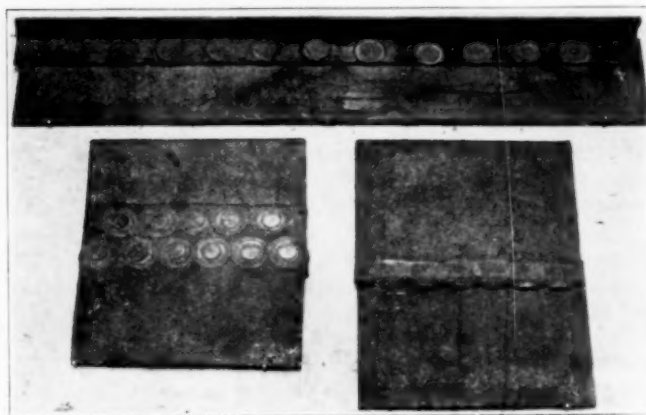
SAMPLES OF ELECTRIC SPOT WELDING
